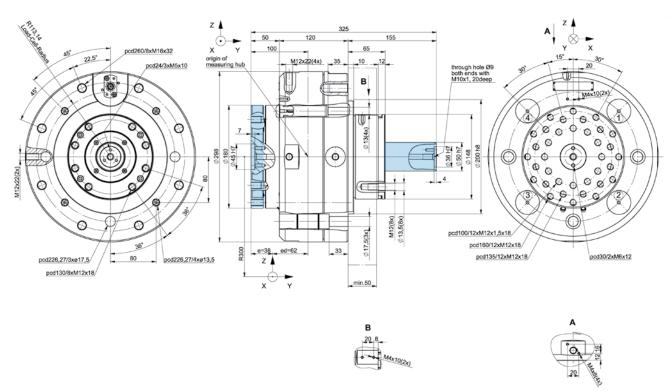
Dimensions of RoaDyn® P530, Type 9295B2, grease lubricated; rotating parts are highlighted in blue
